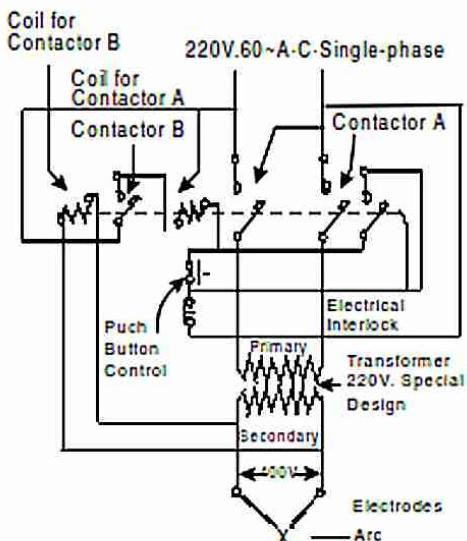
Circuit diagram of apparatus used with atomic hydrogen welding torch.
